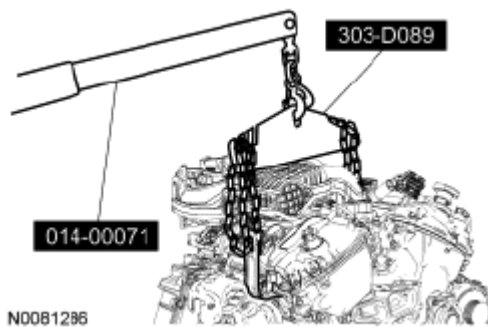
Identifying Heavy Duty Floor Crane And Spreader Bar
